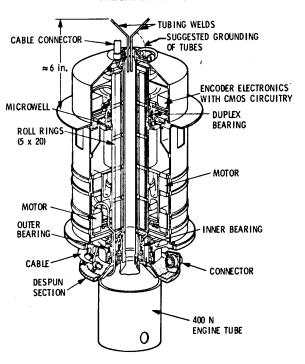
Spin Bearing Assembly and Weld Region
